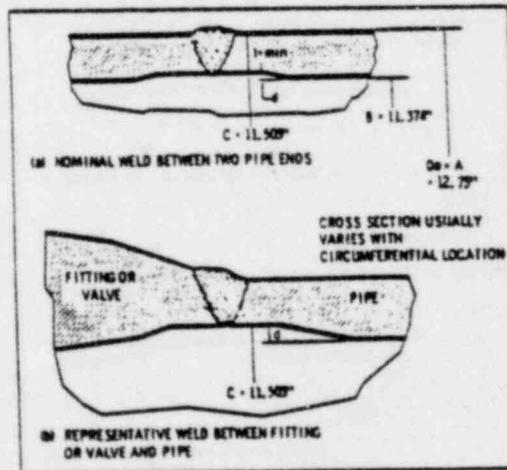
Configuration of Welds (Girth Butt Welds)
